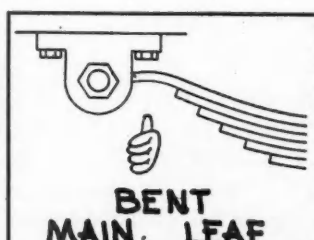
"Frozen" shackle will seize eye and bend or break main leaf.
